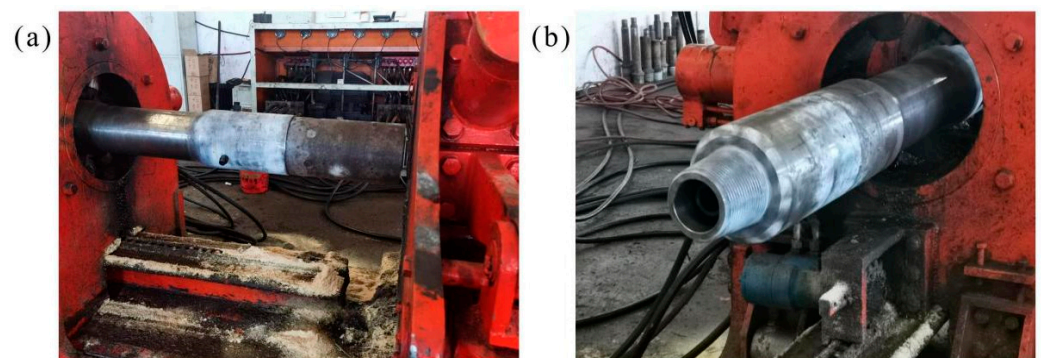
Torsion test equipment. (a) Specimen and lower tooling; (b) specimen and upper tooling.
